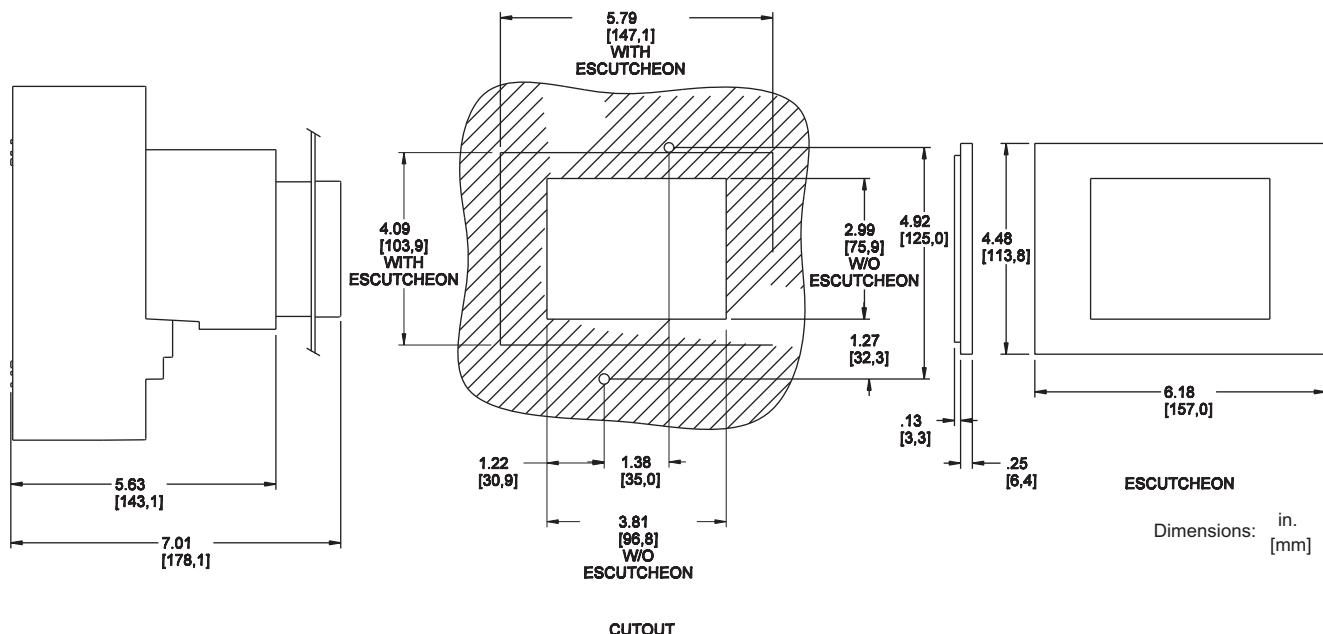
H and J-Frame Circuit Breaker Door Mounted Rotary Handle Cutout
